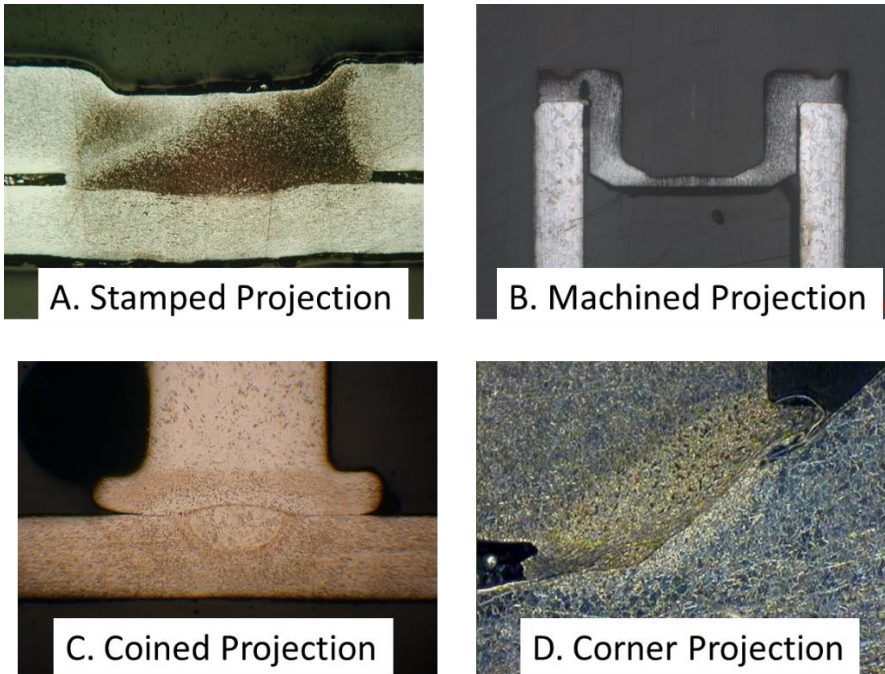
Weld sections of four types of projection weld designs shown in Figure 4. The welds can be fusion or solid-state depending on materials and process parameters.
